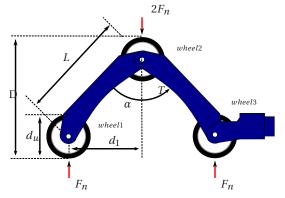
Schematic view of a clamping V-shape. Note that the center wheel has been drawn in driving direction in this figure.
